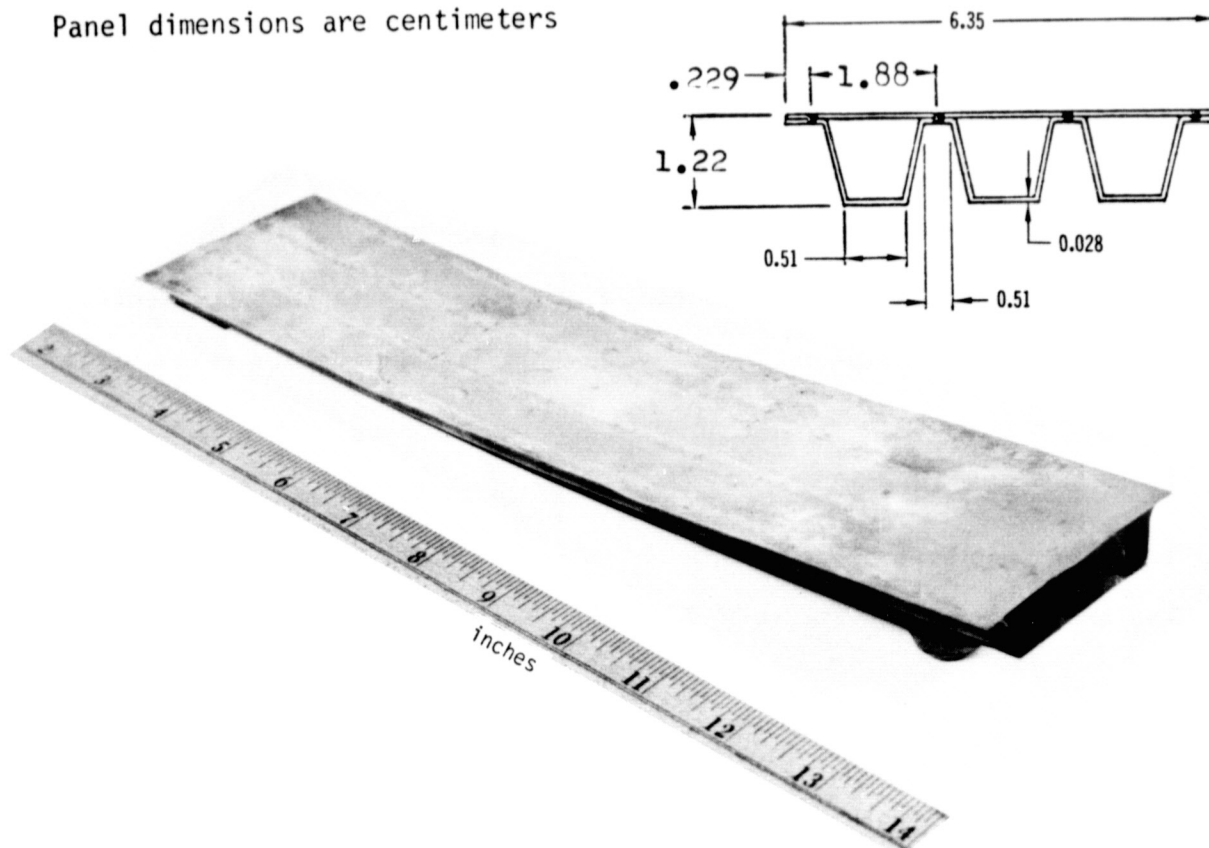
SUBSIZE PANEL R3 CROSS SECTION AND PHOTOGRAPH AFTER TEST
